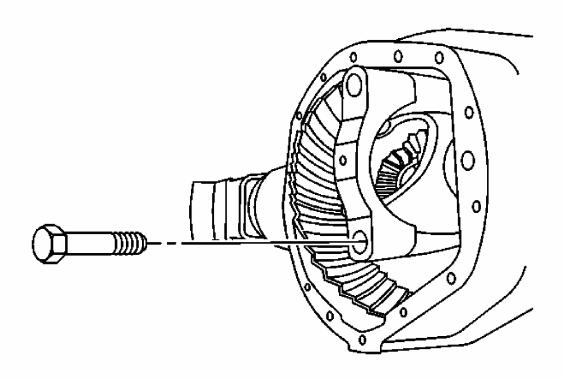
Removing/Installing Bearing Cap Bolt Courtesy of GENERAL MOTORS CORP.
